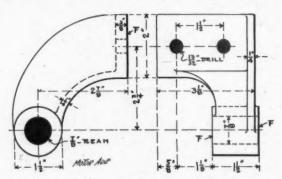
BRAKE LEVER SHAFT BRACKETS.
